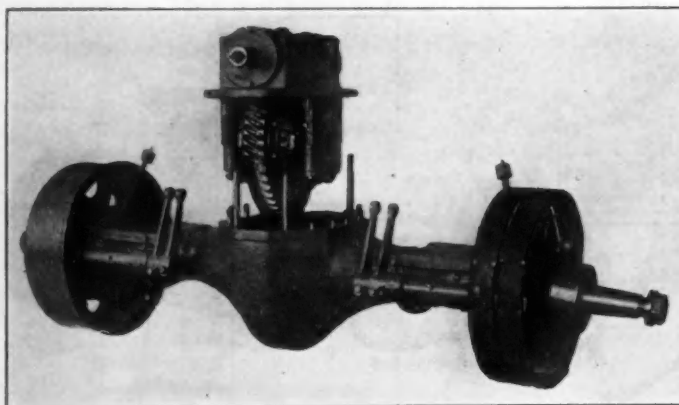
WORMWHEEL AND WORMWHEEL CARRIER USED WITH THE AXLE ILLUSTRATED IN FIG. 9
